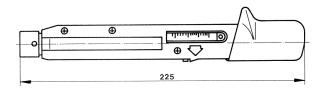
Torque wrench 4 ... 20 N·m Type 1300A39
